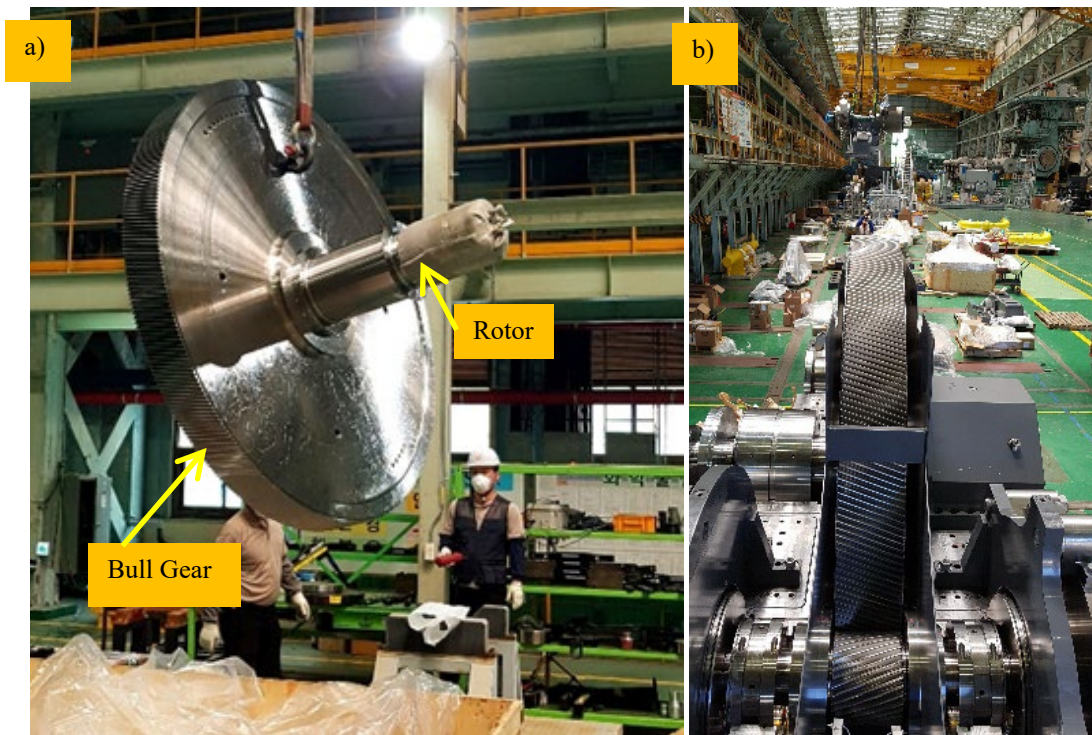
a) Bull Gear, b) Bull Gear and Expander Pinion Assembled in Gearcase
